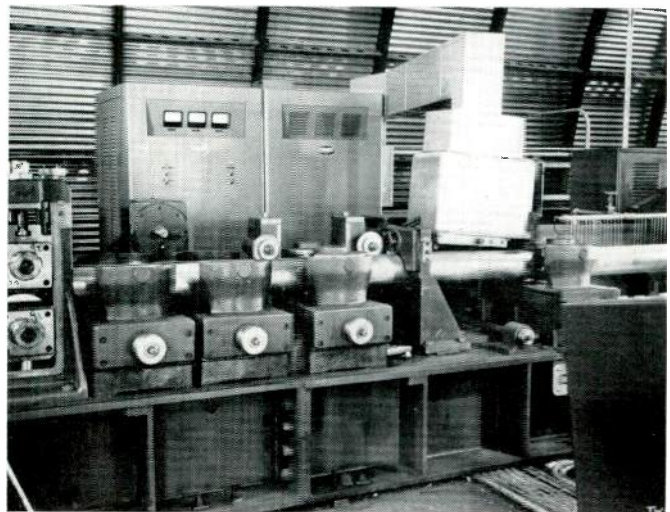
Center section of tube mill with Thermo-tool high frequency generator and welding head.
